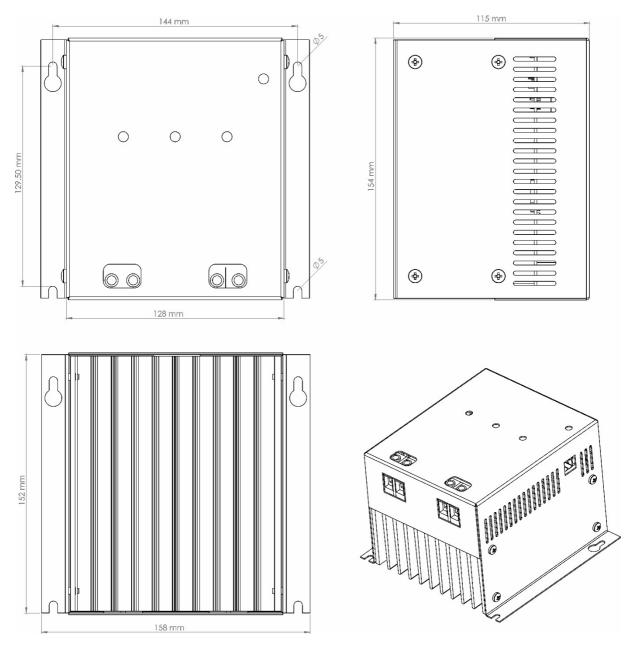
12kVAr and 25kVAr modules technical drawings
